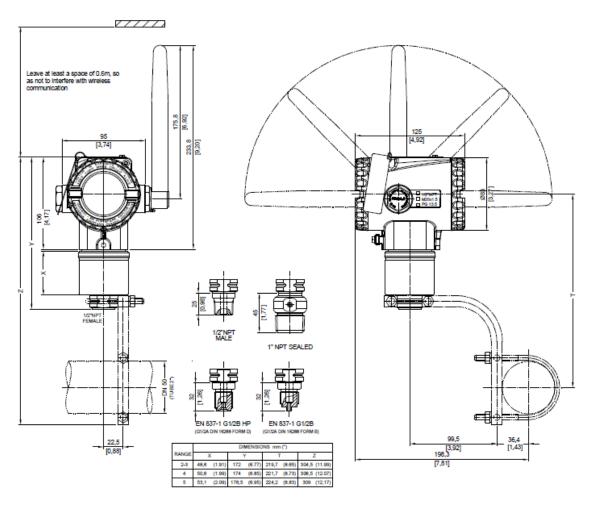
(f) – Dimensional Drawing and Mounting Position for the LD400 WirelessHART $^{\text{TM}}$ – Gage Inline Pressure Transmitter
